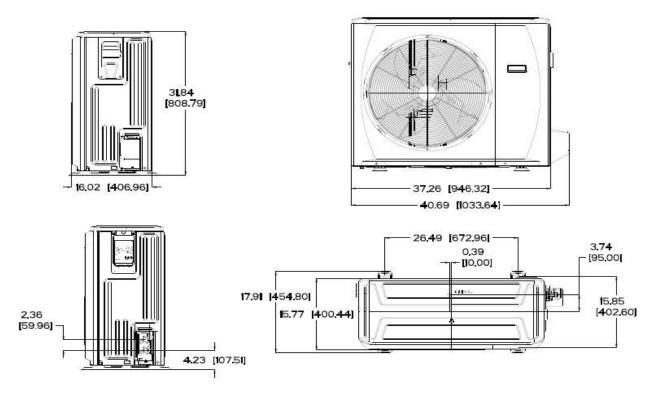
Dimension Sizes 24K, 30K, and 36K
